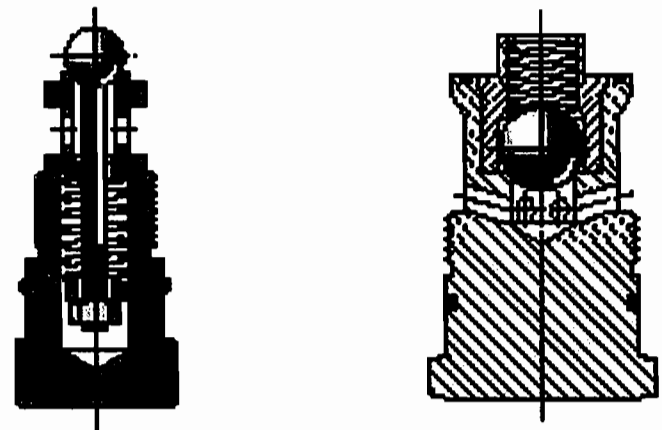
Hydraulic Oil Replenishment (Snifting) Valves.
